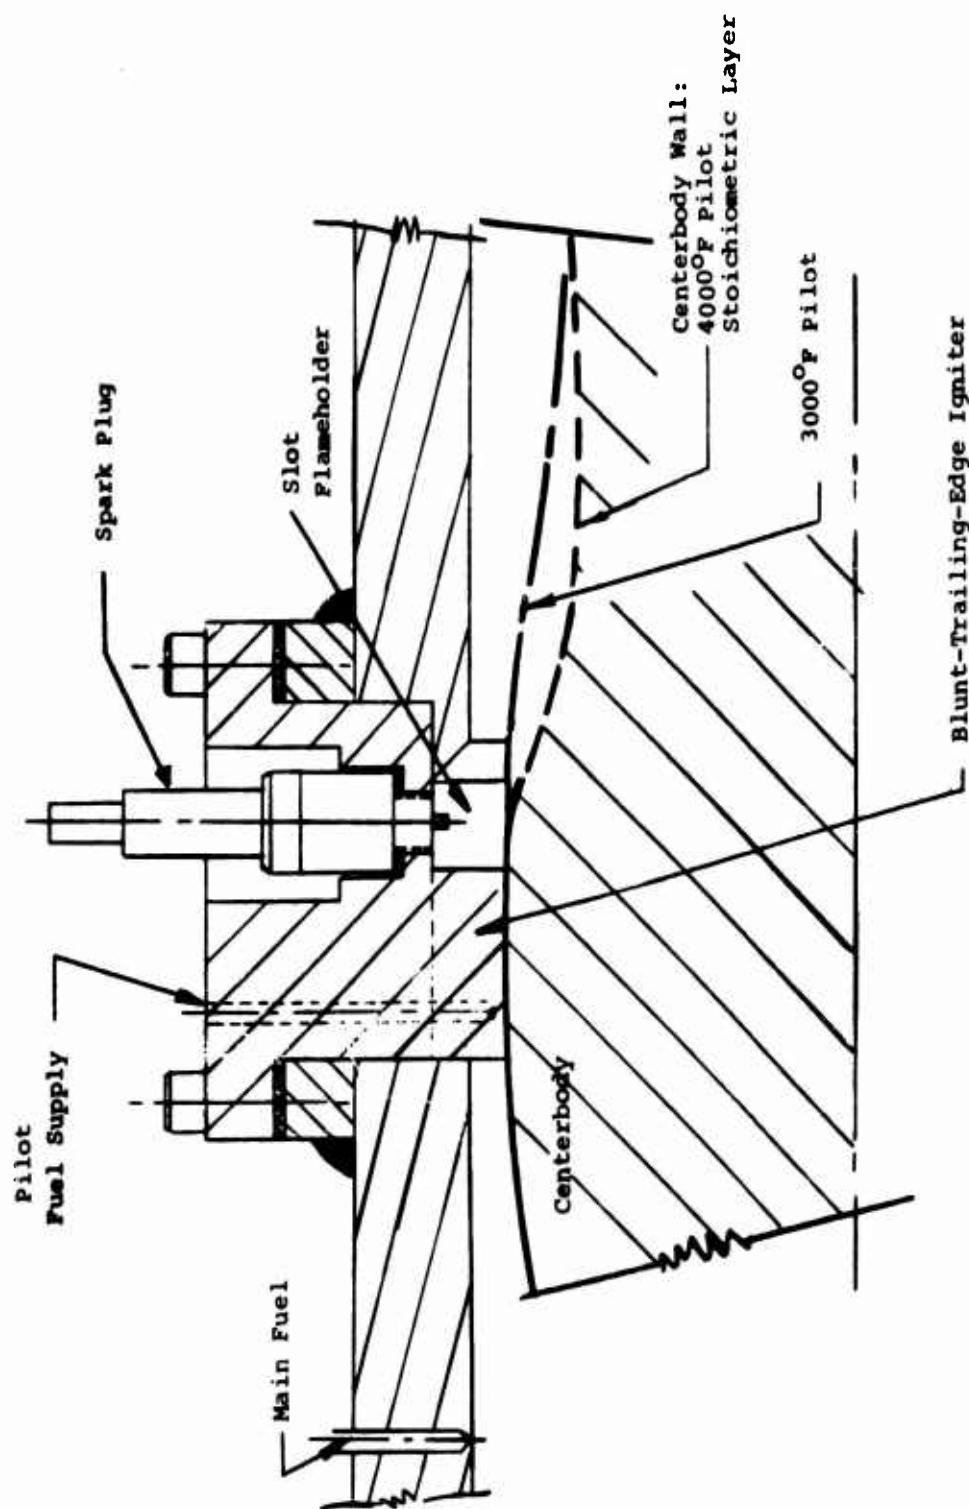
Drawing of Typical Igniter and Flameholder Slot
